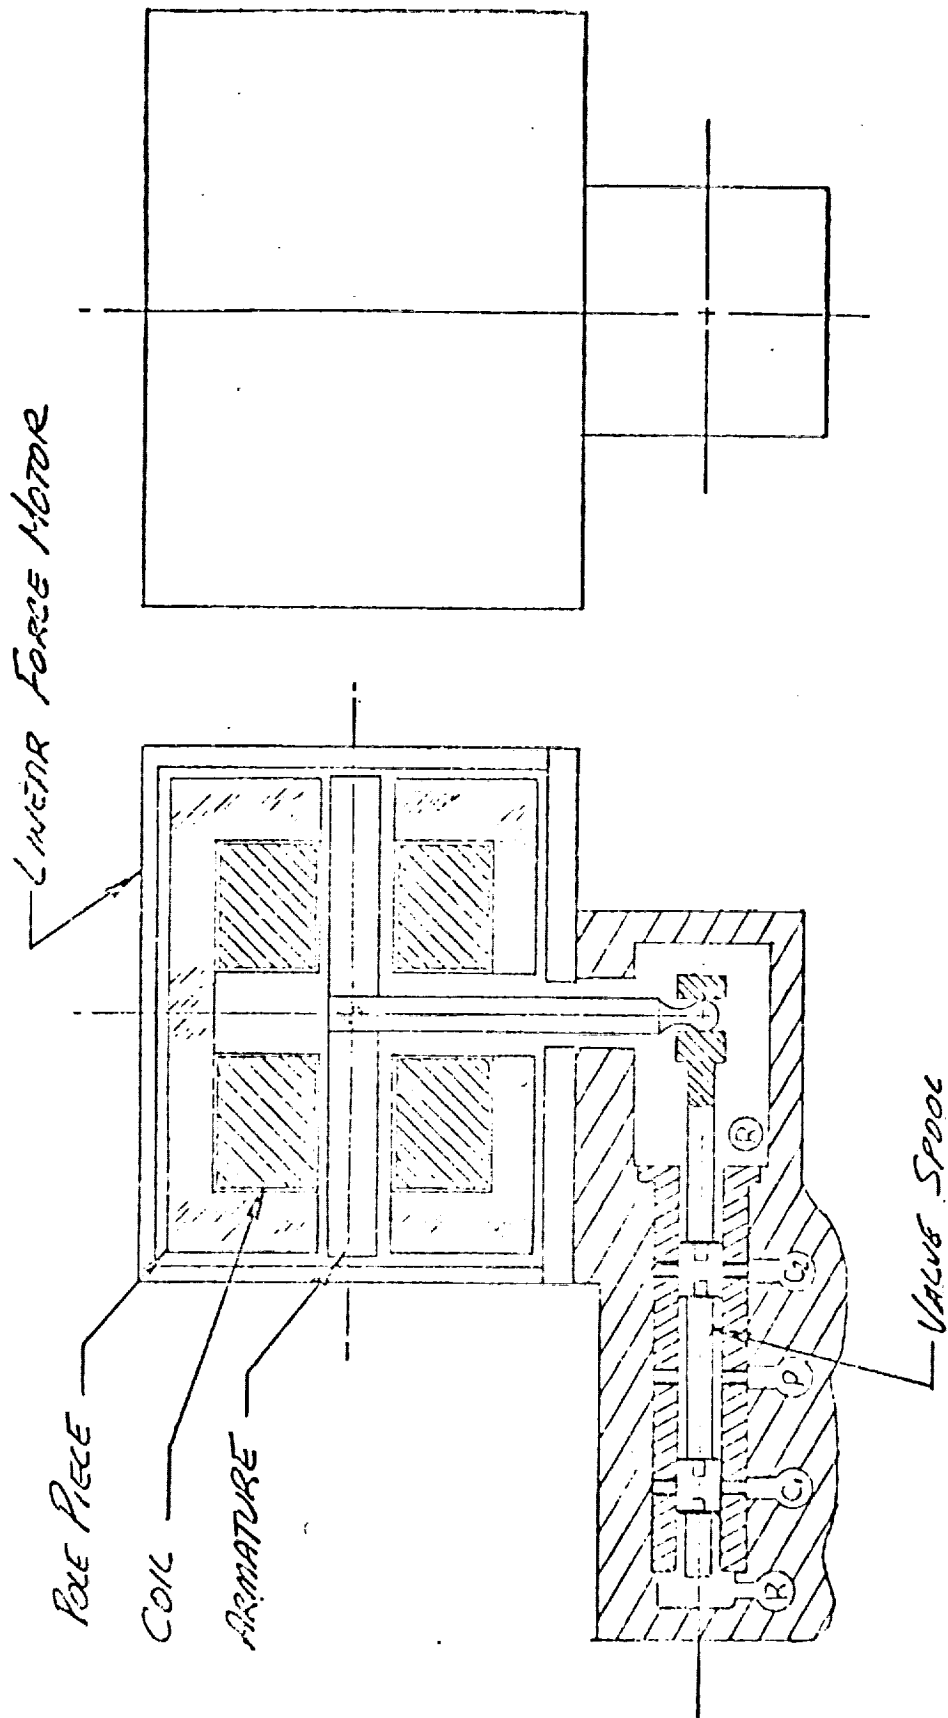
DIRECT DRIVE CONTROL VALVE PACKAGING ARRANGEMENT
